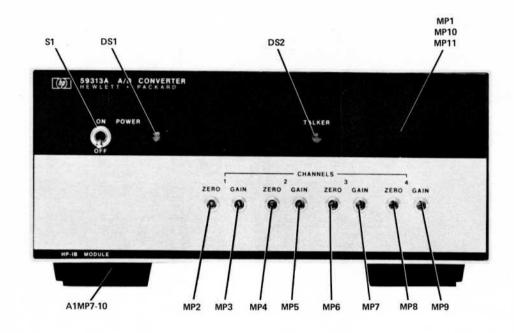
Component Locations, Front Panel Assembly A1A1
